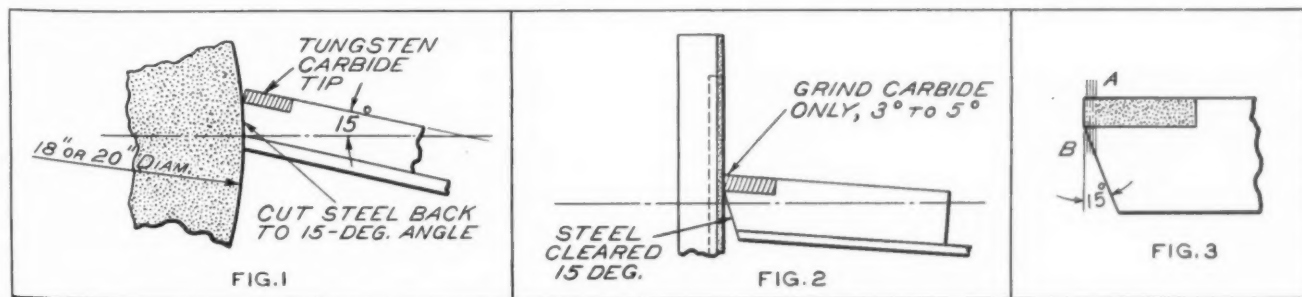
Using Vitrified Wheel for Offhand Grinding of Steel Shank. Fig. 2. Using Diamond Wheel for Grinding the Tungsten-carbide Tip. Fig. 3. Showing Result of Second to Fifth Regrindings
